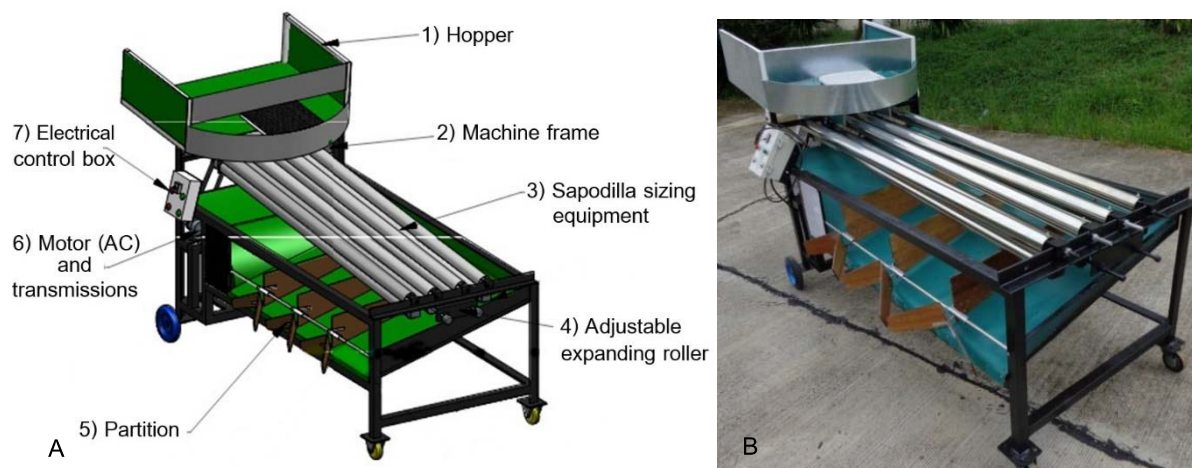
Details drawing (A) and assembly of the sapodilla sizing machine using expanding roller (B).
